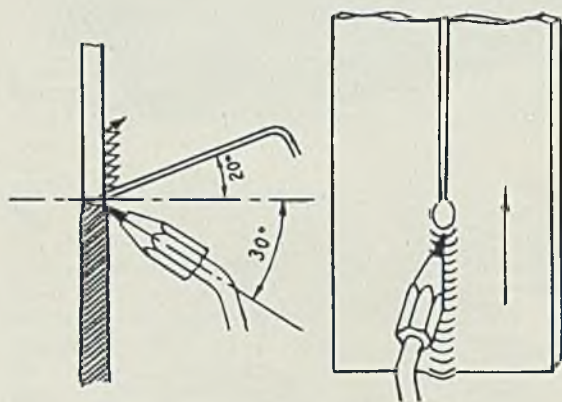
Upward welding with the oxyacetylene process, using one torch
